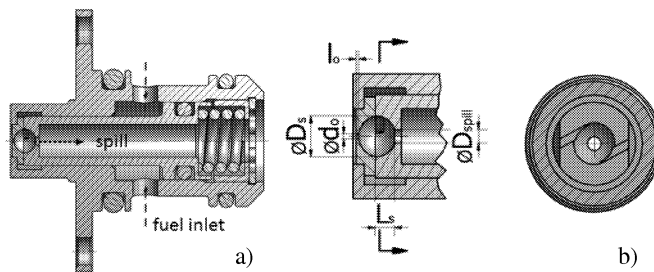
a) section view of the tested nozzle; b) swirl chamber detail
